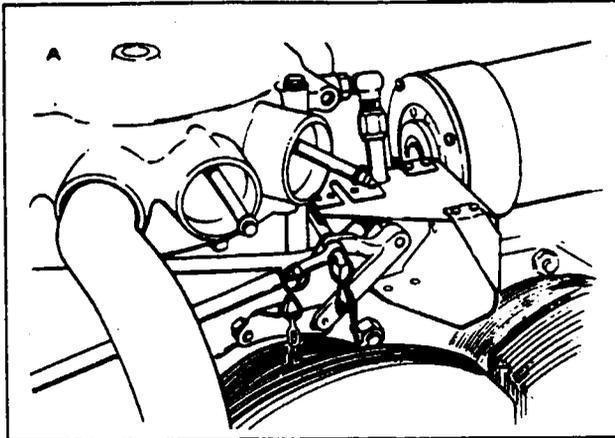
Fixture ST-319 installed and showing cross-shaft control lever in closed throttle position.
